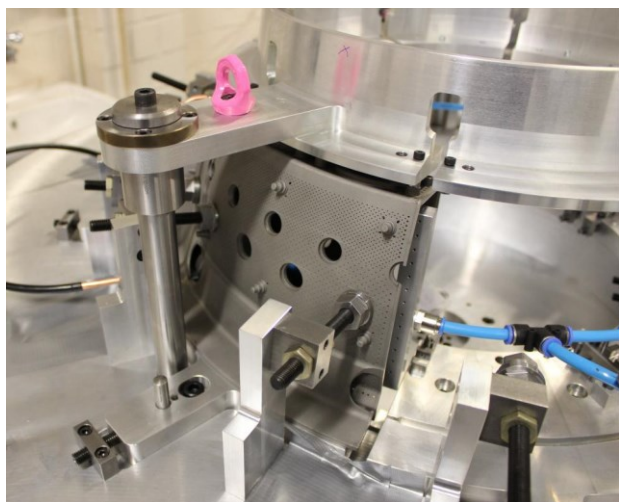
Welding jig for combustor (photo courtesy PHOTON Laser Engineering)
